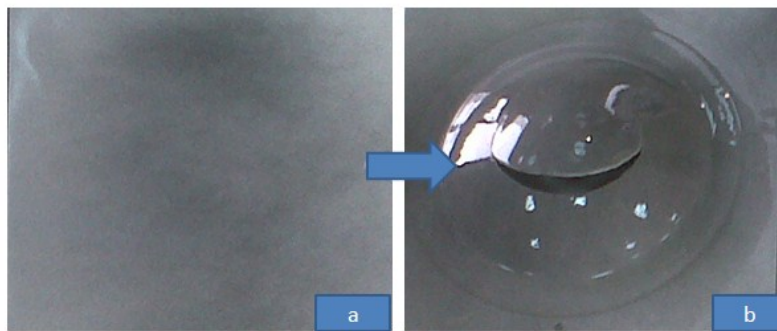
(a) Initial geometry of workpiece material (b) Bulged specimen
